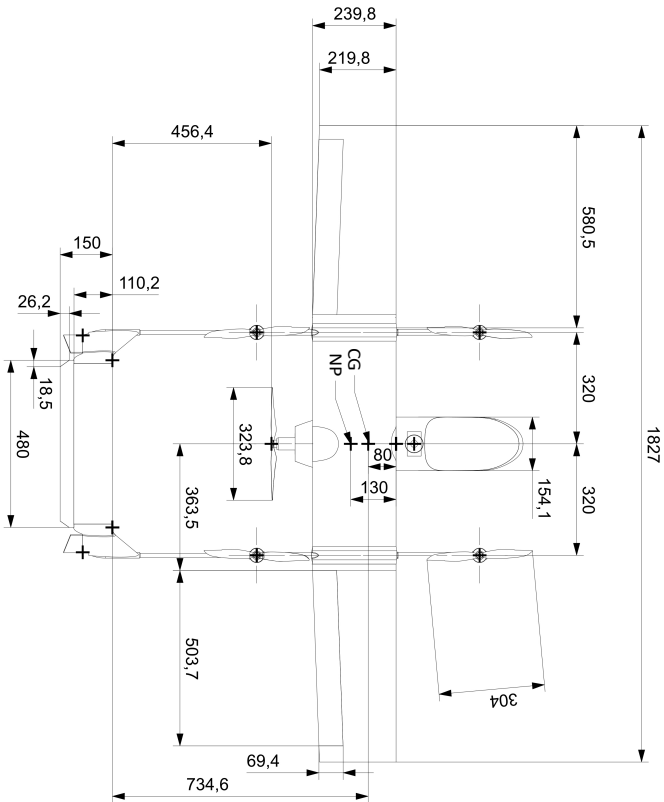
Technical drawing of the hybrid Scihunter UAS, top view [Frö+19]
